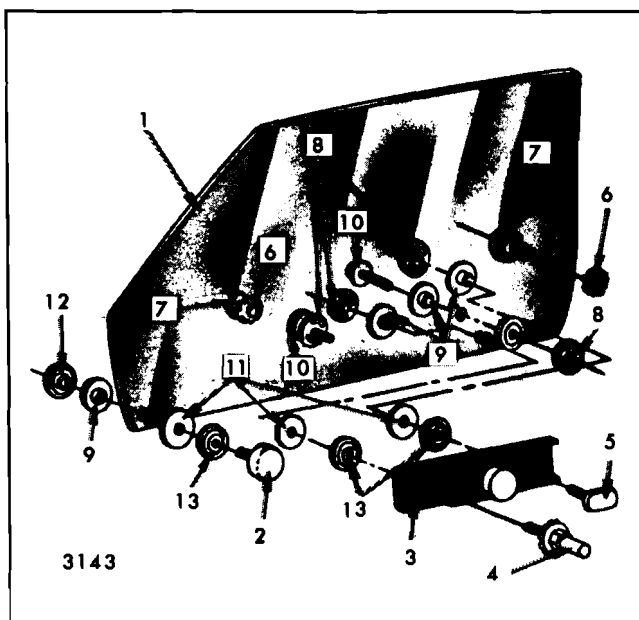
Front Door Window Assembly - "B and C-37, 47, 57, and 67" Styles
